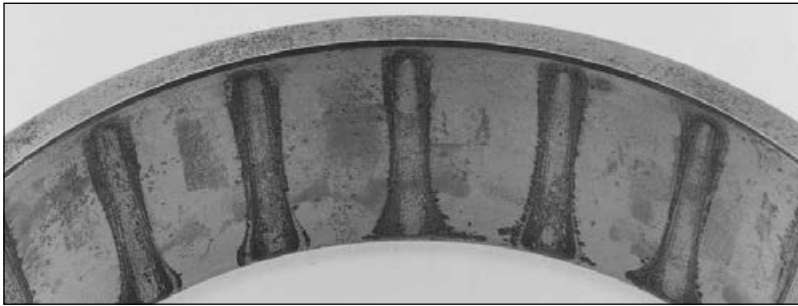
This cup has heavy corrosion on the race. This type of corrosion may only be a surface stain without pitting. If the staining can be cleaned with a fine emery cloth or crocus cloth, the bearing may be reused. If there are pits that cannot be cleaned with light polishing, the bearing should either be discarded or, if practical, refurbished
